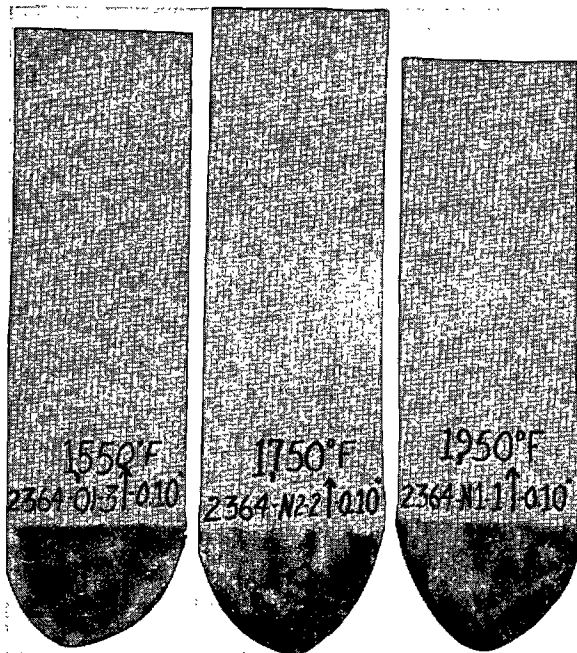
Sheet rolled from sand-cast slabs to 90-pct reduction at 1,550°, 1,750°, and 1,950° F. Heat 64-B. Sand-blasted except tailing end.
